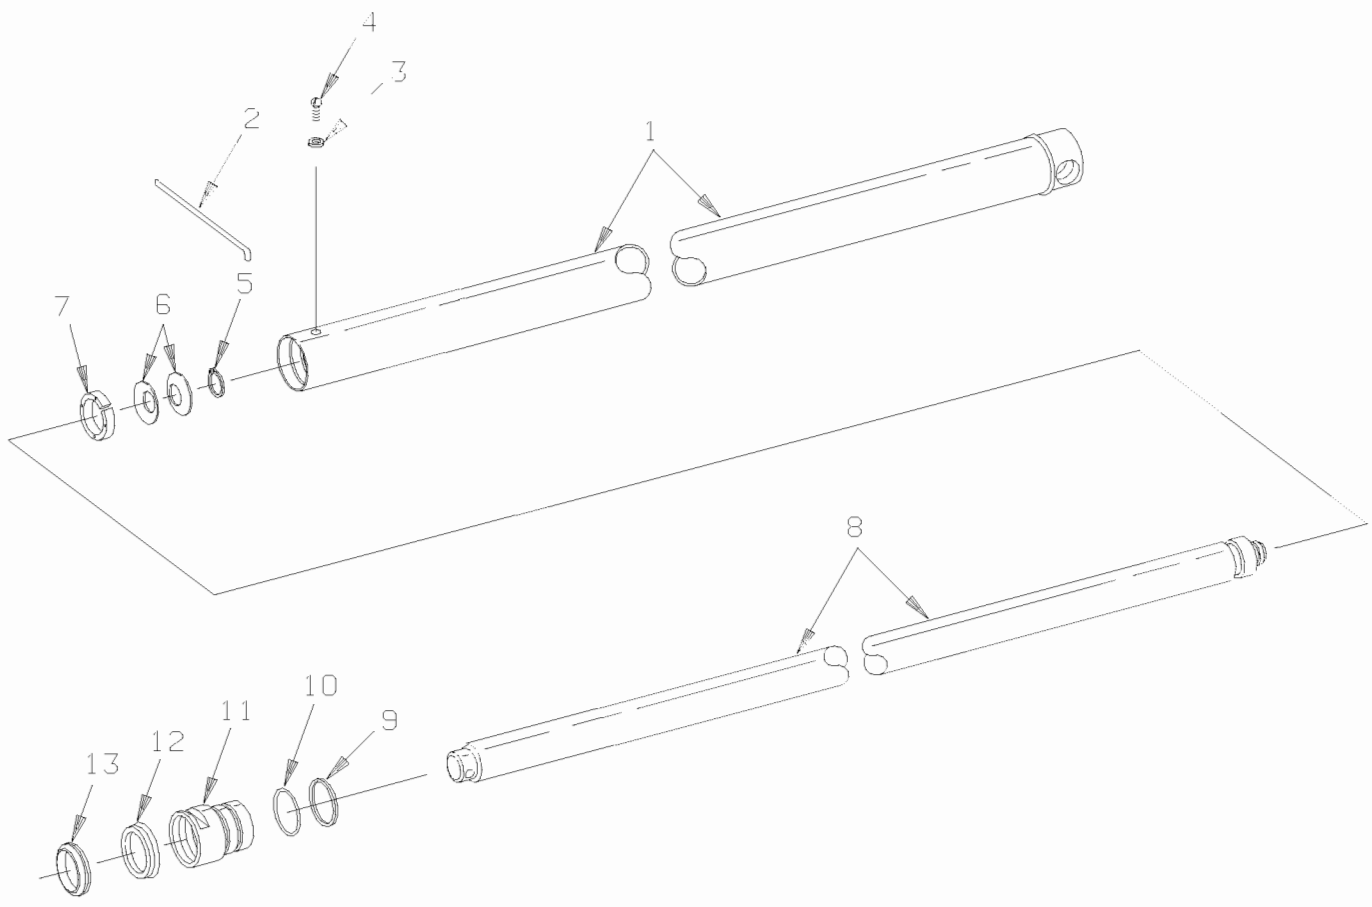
SC-30 THREE STAGE FREELIFT CYLINDER ASSEMBLY (300486-000)
